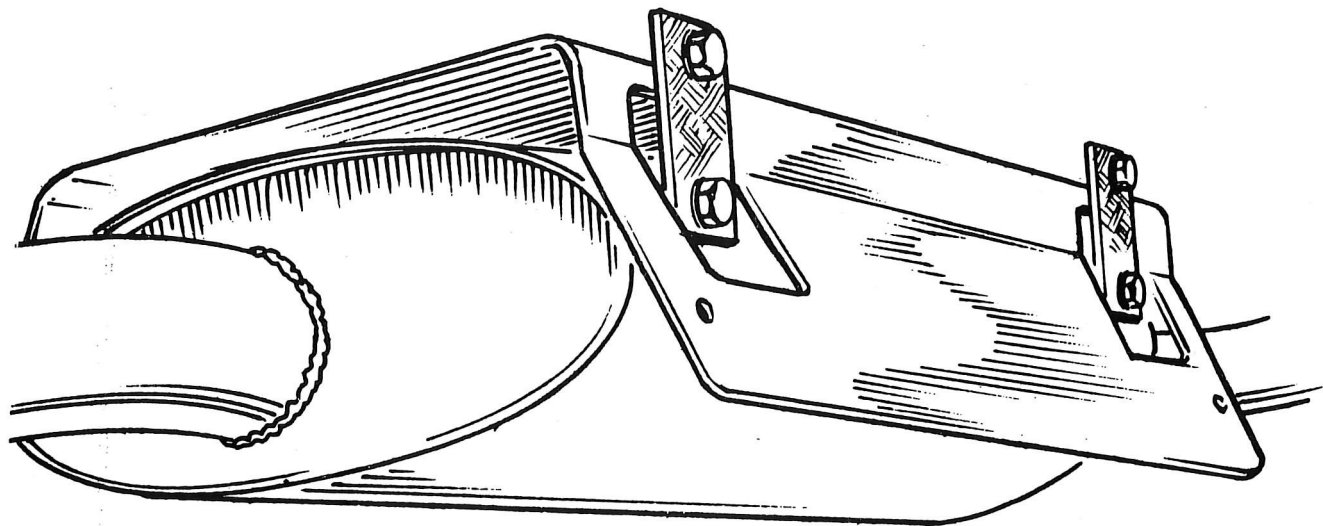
VIEW OF TRANSVERSE SHIELD IN POSITION
